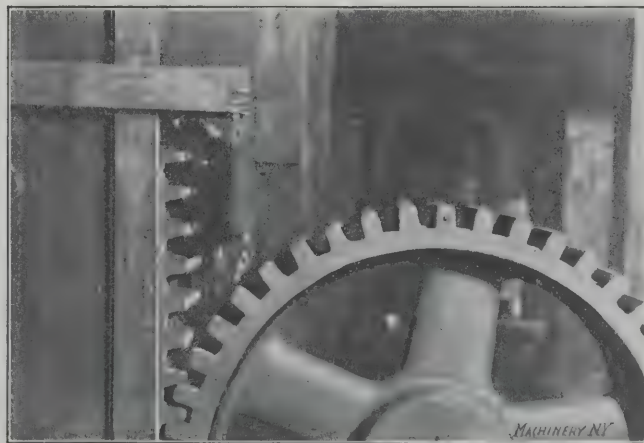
Section of the Driving Gear, and "Jack" Gear with which it meshed
